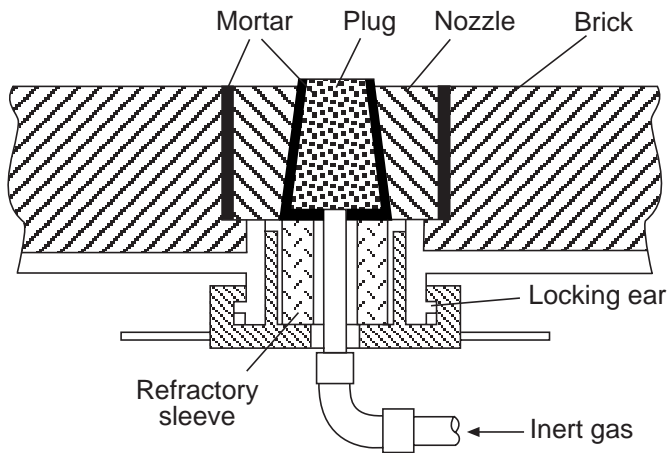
Porous plug assembly in the bottom of a ladle. From Ref. 2.
